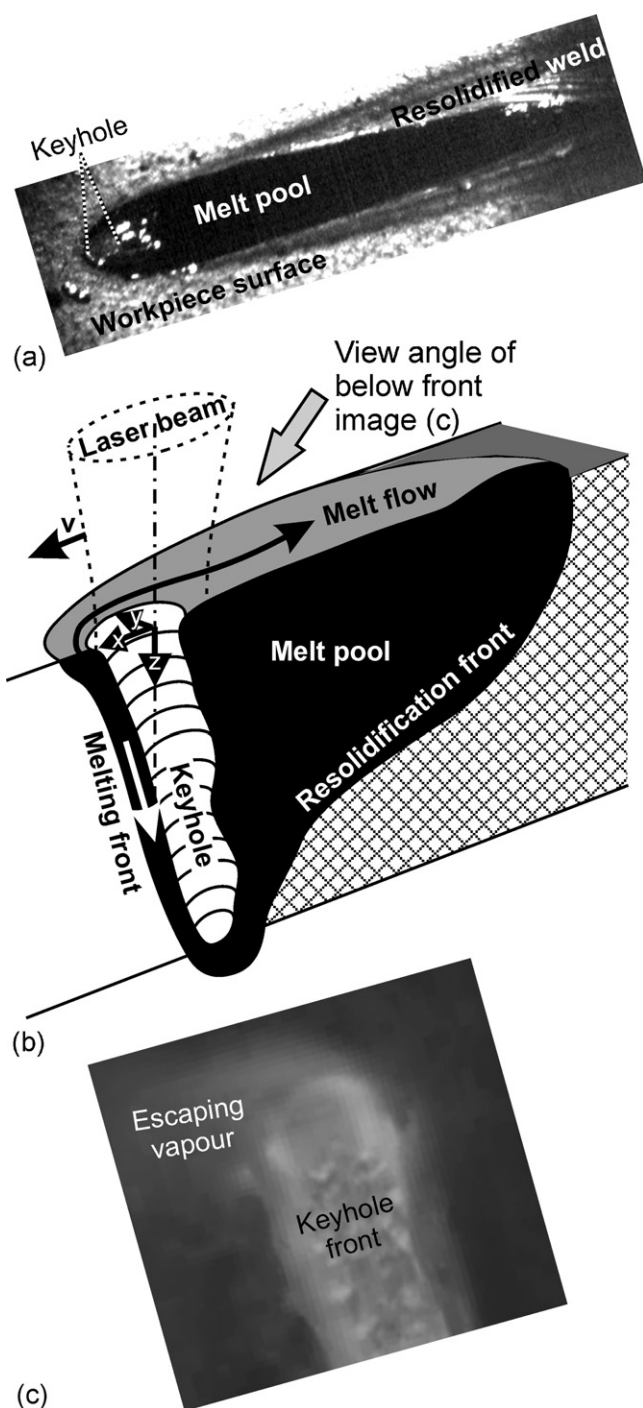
Process of keyhole laser welding: (a) high speed image of the top surface (tilted view from the side), (b) sketch of a vertical xz -section of the melt pool and keyhole, and (c) high speed image of the keyhole front surface waves (upper part, by tilted view from the rear side).
